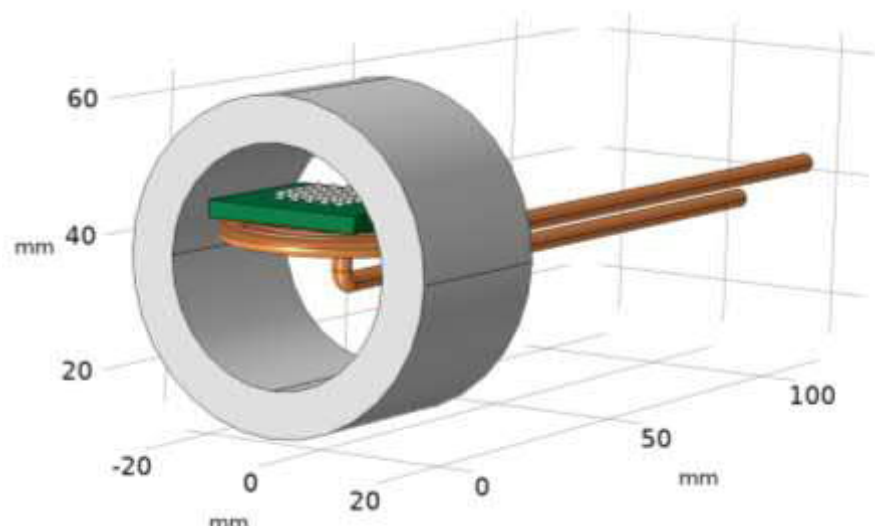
Model of induction heating with a closed magnetic circuit and a printed circuit board with solder balls on copper contact pads
